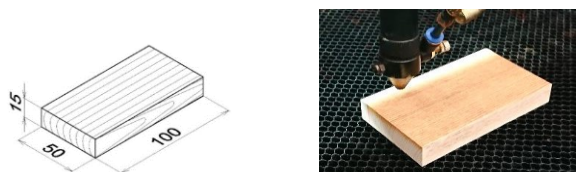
Test specimen (left) and CO₂ laser engraving (right)
